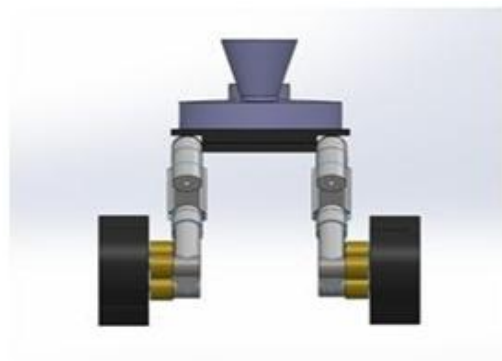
Solid Works Front View 3d Models Of Rocker Bogie System
